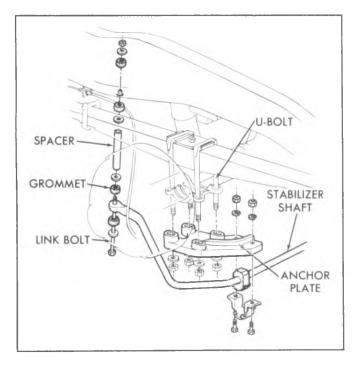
D-10--Rear Stabilizer Shaft-C-20(43), C-30
